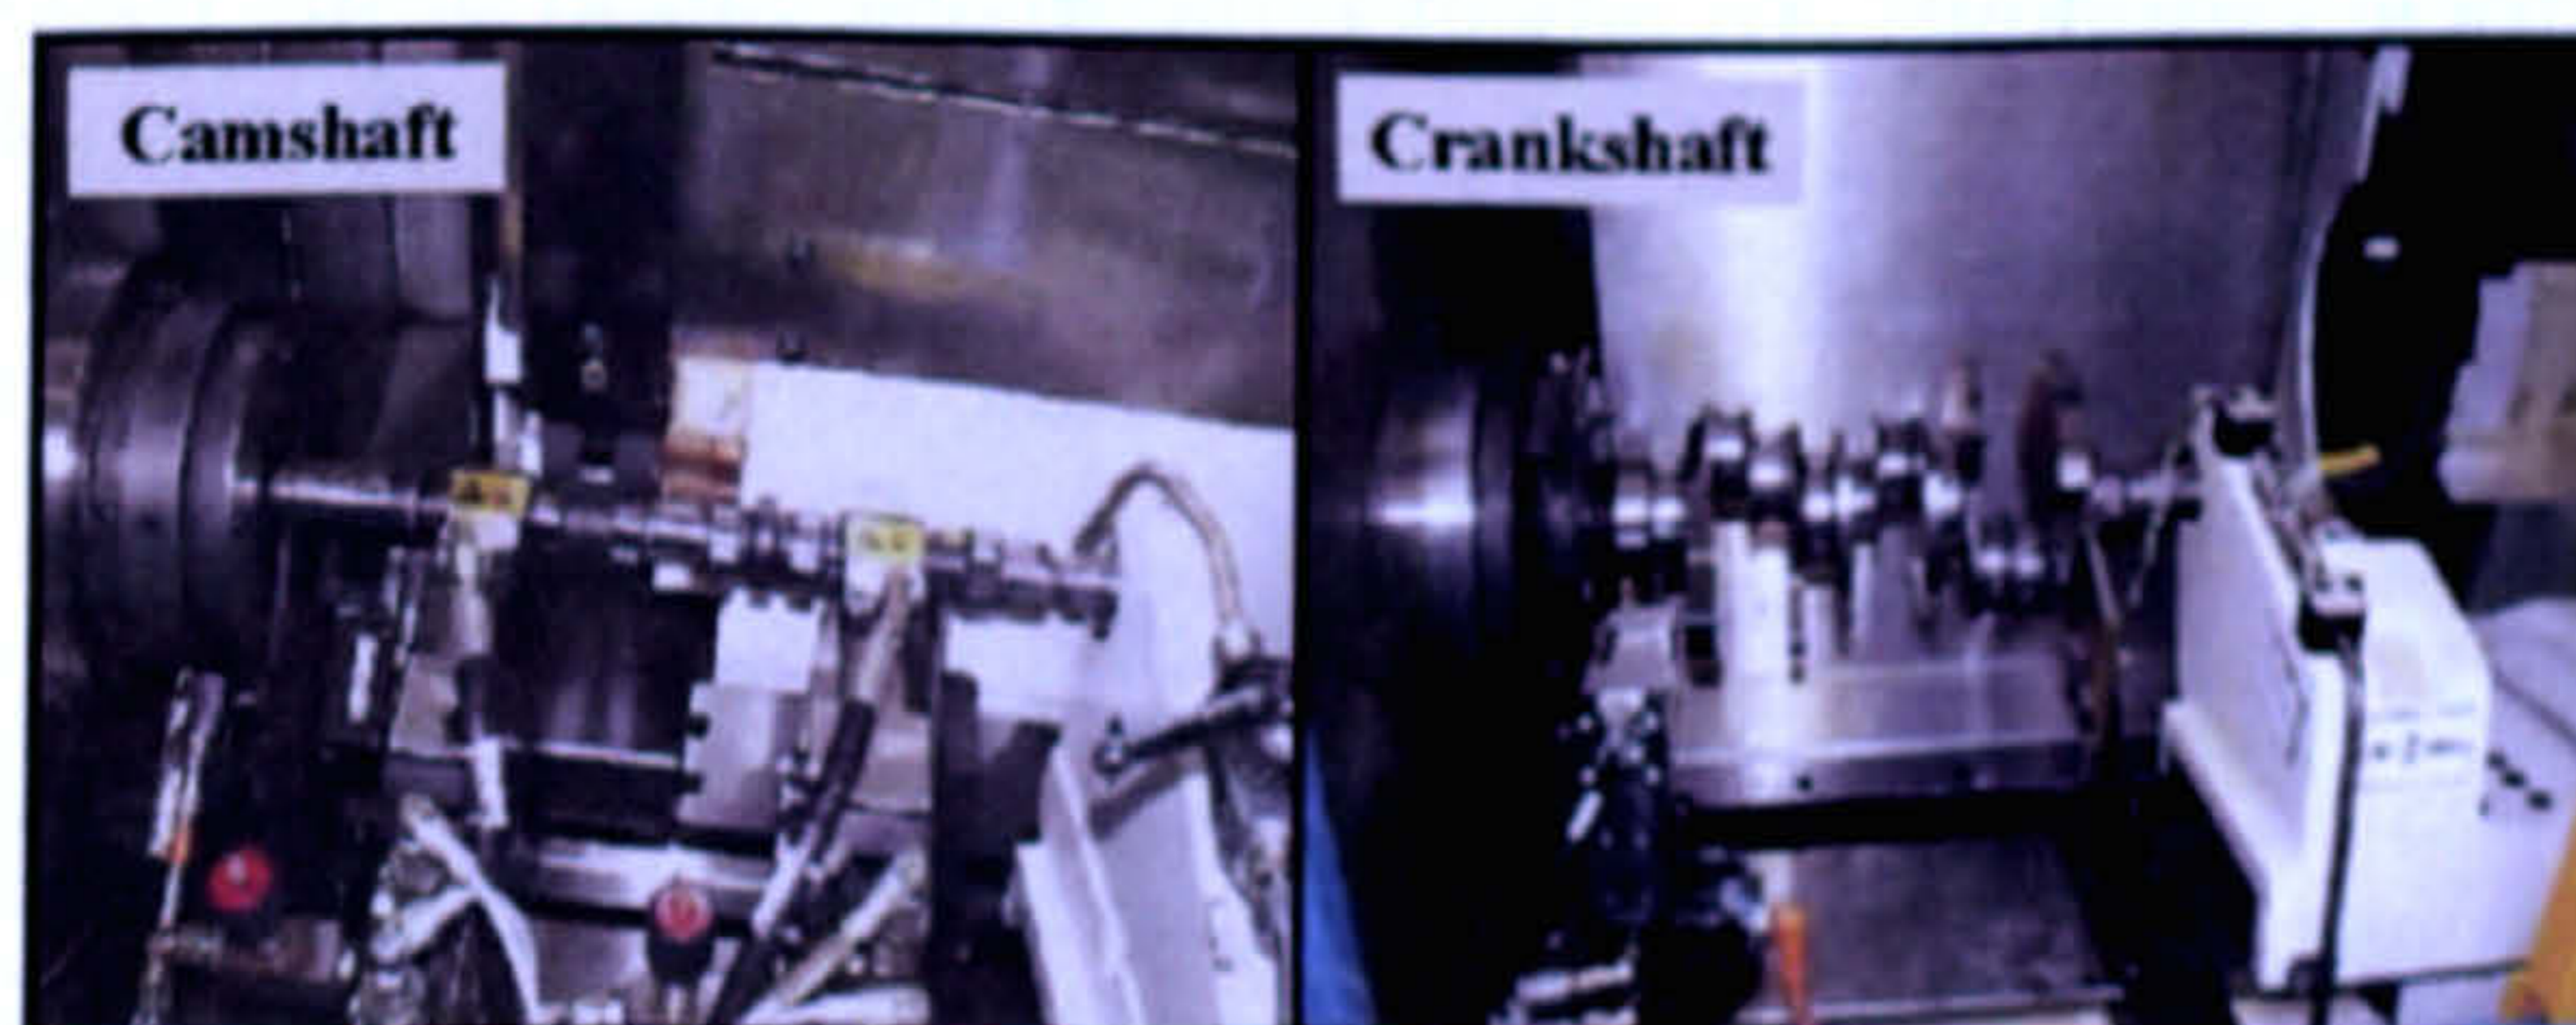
Photograph of LT1 with Cam & Crankshaft Components
